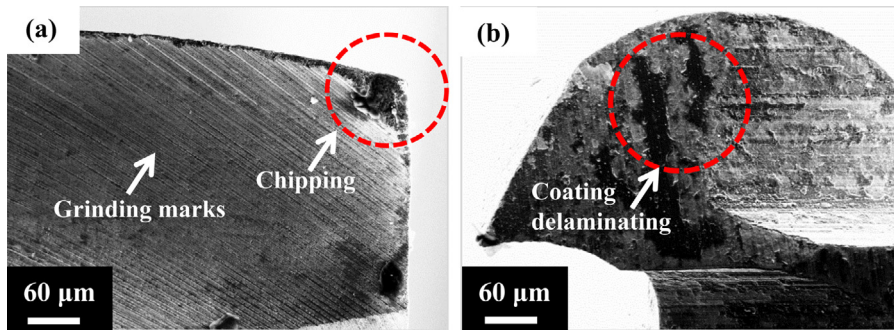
Various defects formed on: (a) uncoated and (b) TiAlN coated micro-end mill after machining a length of 300 mm.
